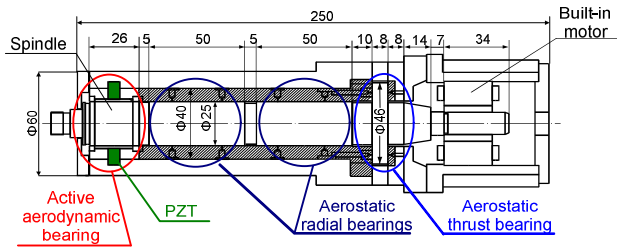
Hybrid air-bearing spindle employing aerostatic radial /thrust bearings and active aerodynamic radial bearing
